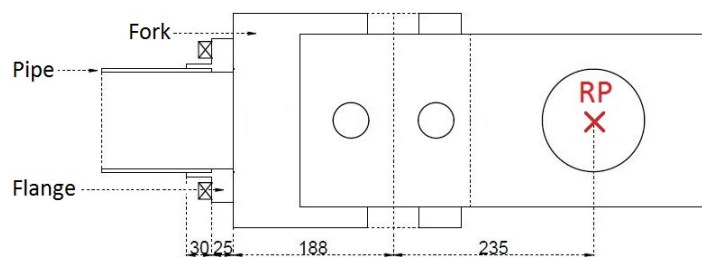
Sketch for distance between pipe weld and rotation point of the stretch bending rig. The sketch illustrates a vertical cut in the pipe-rig connection
